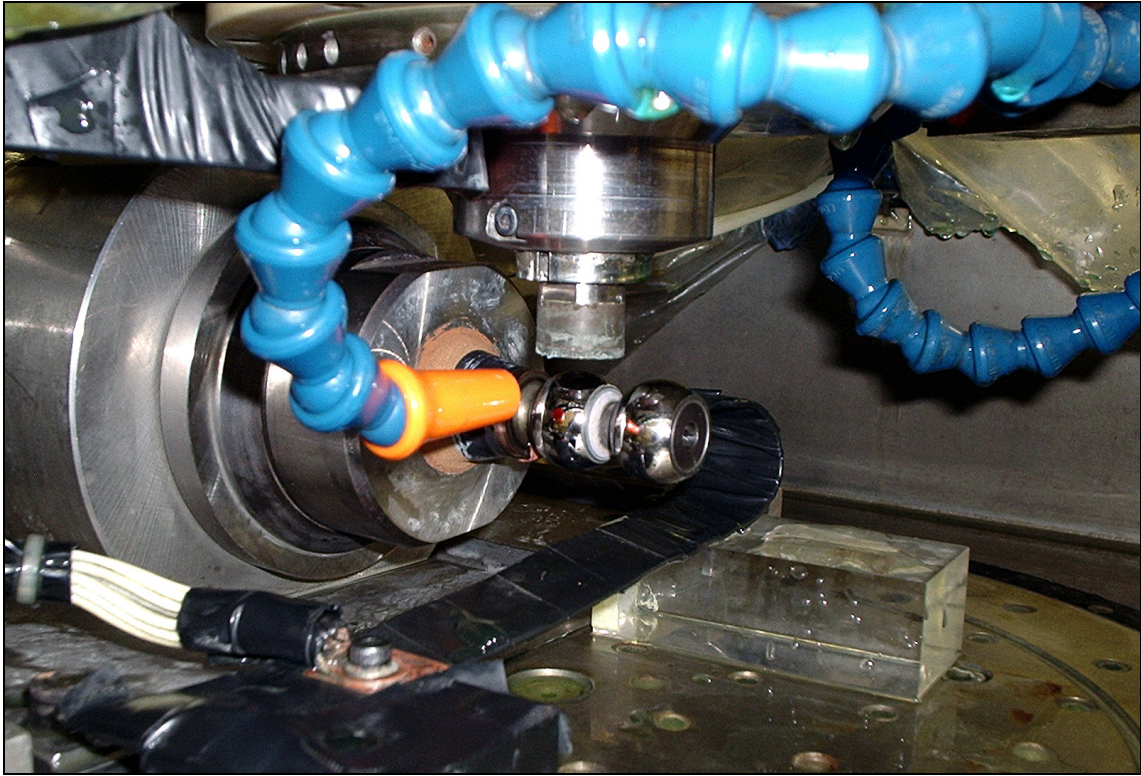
Photograph of Elid 1 superfinishing set-up / fixturing at Cranfield
